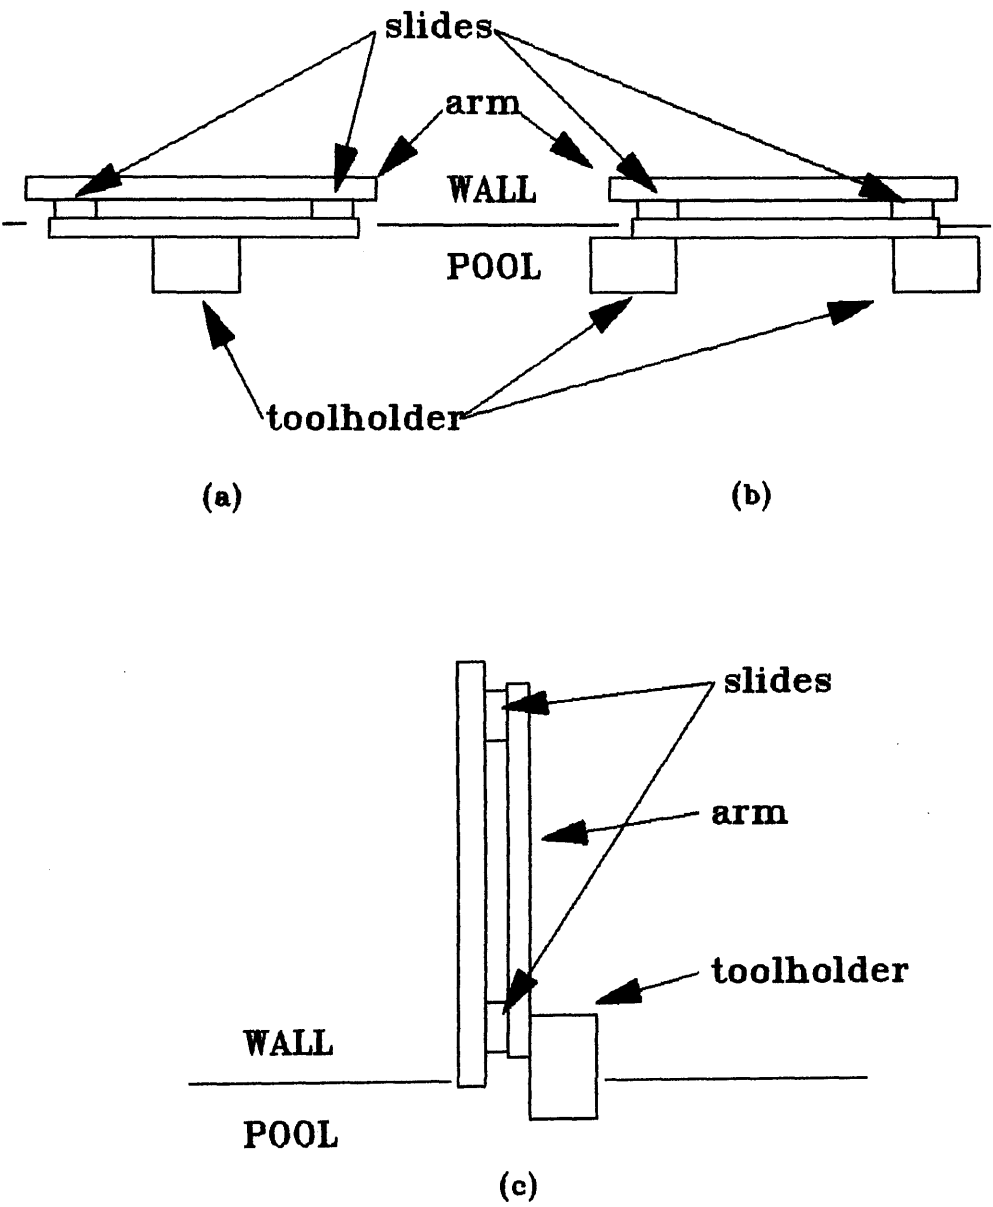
Alternative Arrangements Of Drive Unit.
